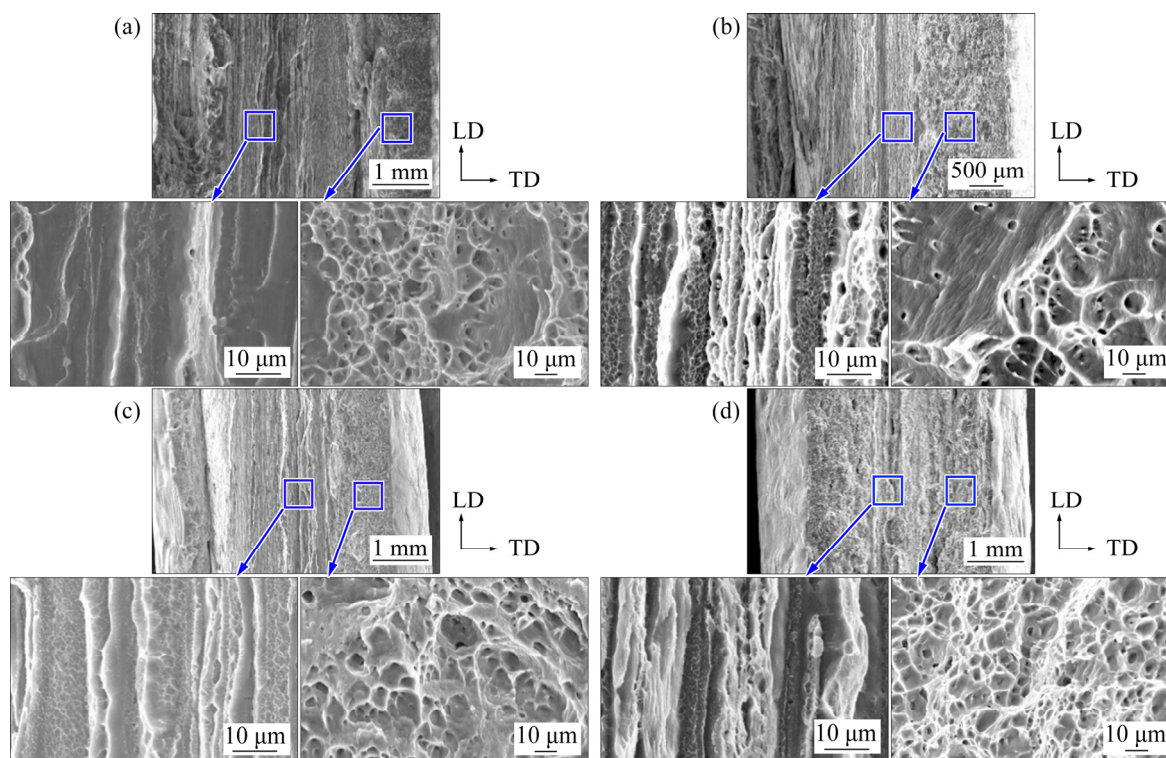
Macro-fractographs of 90°-weld specimens formed at different rotational speeds: (a) 6 r/min; (b) 7 r/min; (c) 9 r/min; (d) 11 r/min
